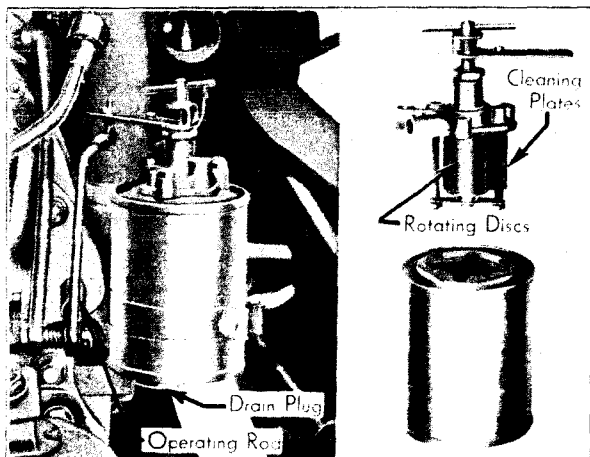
The oil filter on 370-B and 452-B engines is of the revolving disc type and is self cleaning
